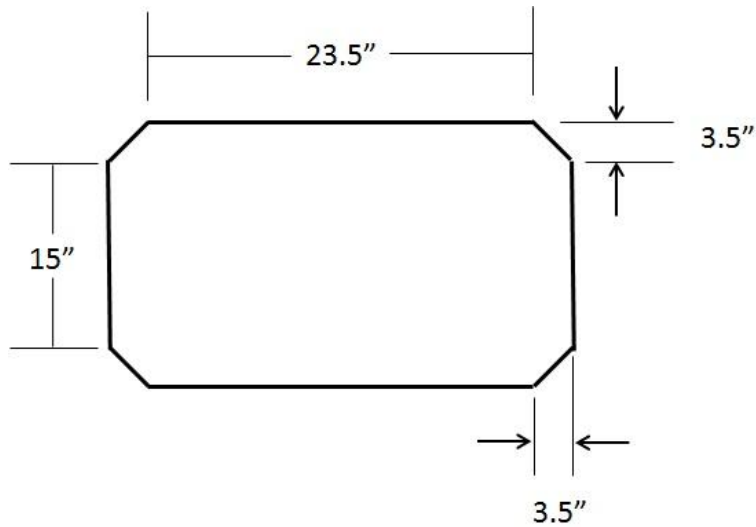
KU Small Subsonic Wind Tunnel Test Section (Cross-Section View)
